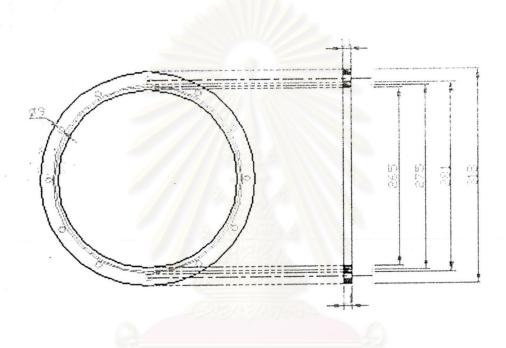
The top and the bottom ring plate of the chamber (in mm unit)
